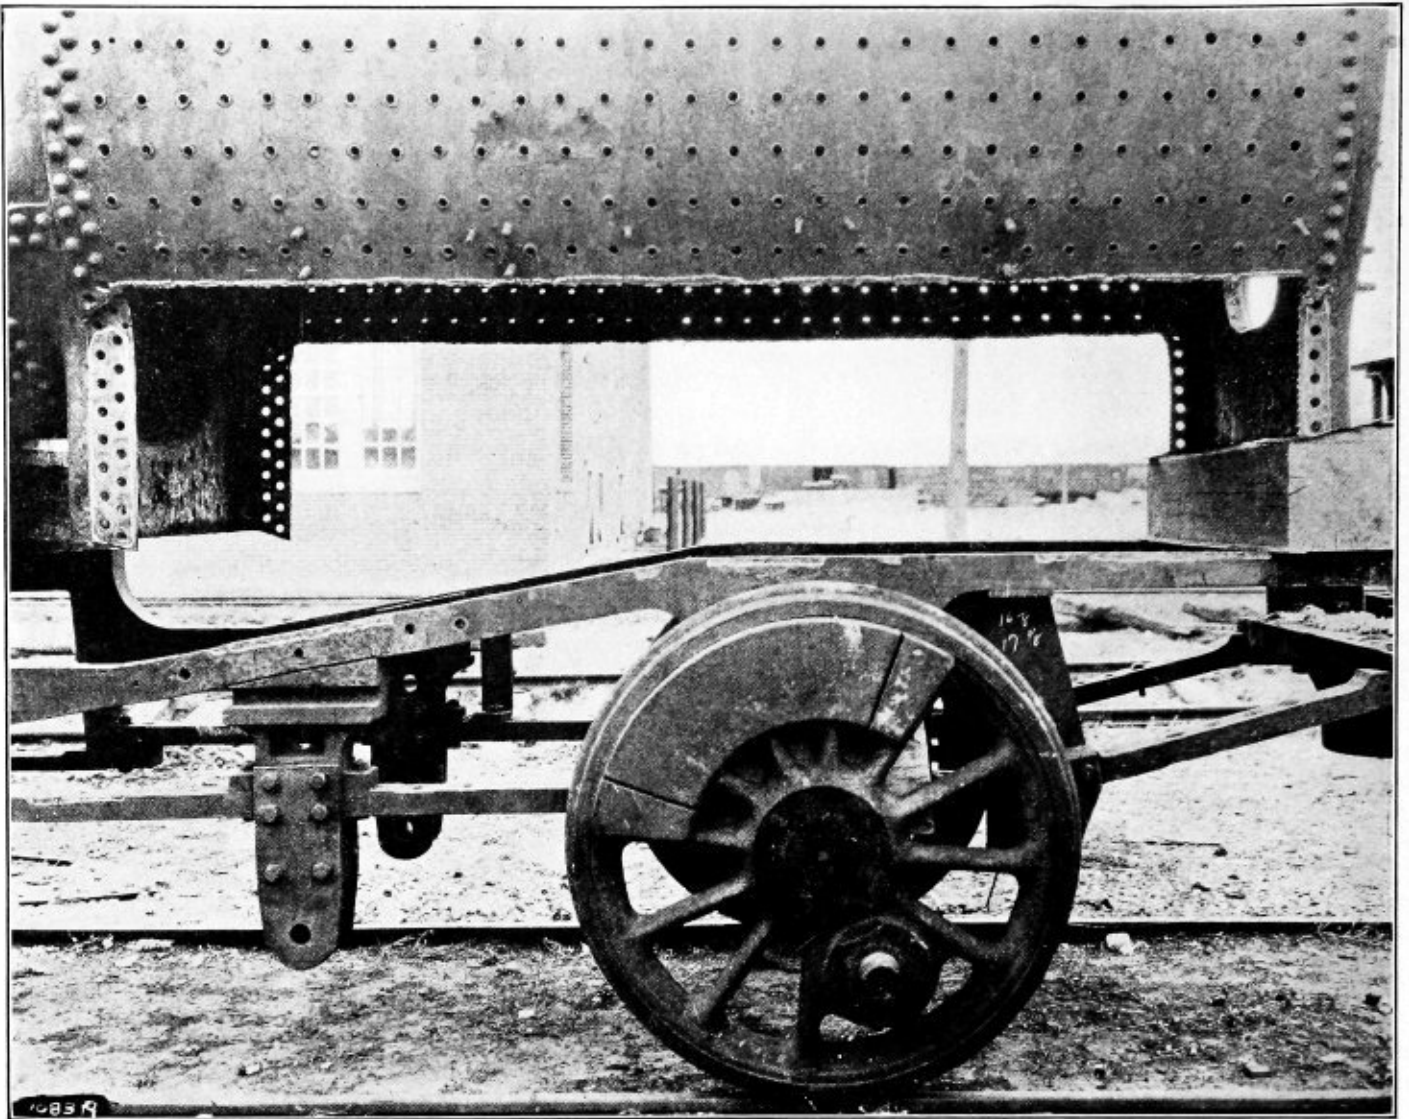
Firebox Side Sheets Cut Away Preparatory to Welding in New Sheets. Electric Arc Used for Cutting and Welding
